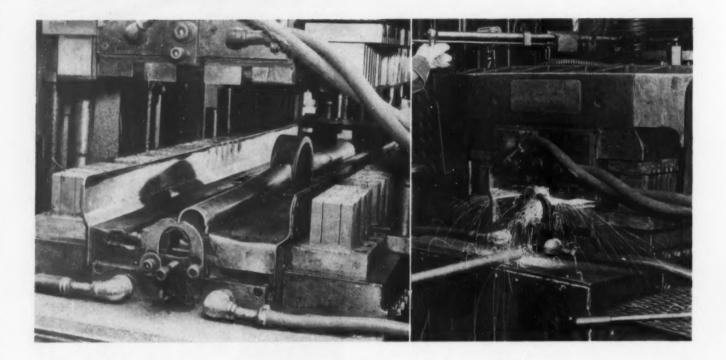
Typical arrangement of parts to be welded by the upset or flash-butt method
